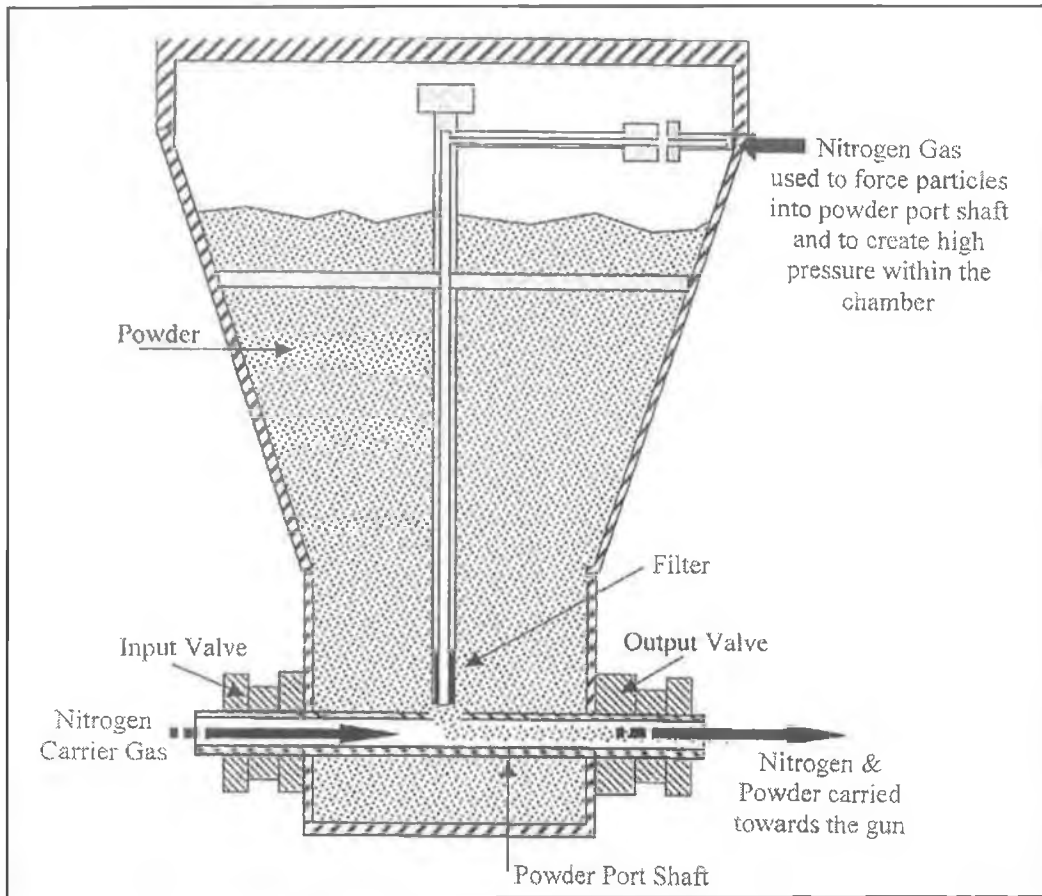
Schematic cross-section of the hopper assembly on the DJ powder feed unit [34].
